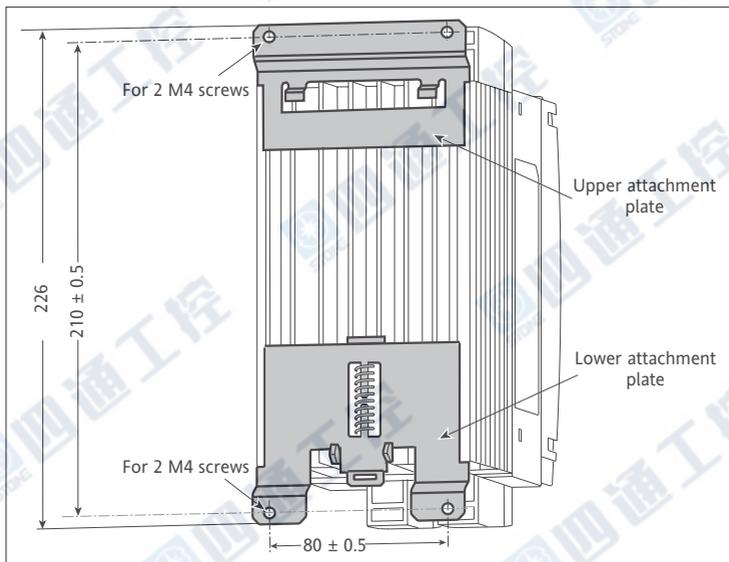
Bulkhead mounting using an attachment plate (80A and 100A, rear view).
